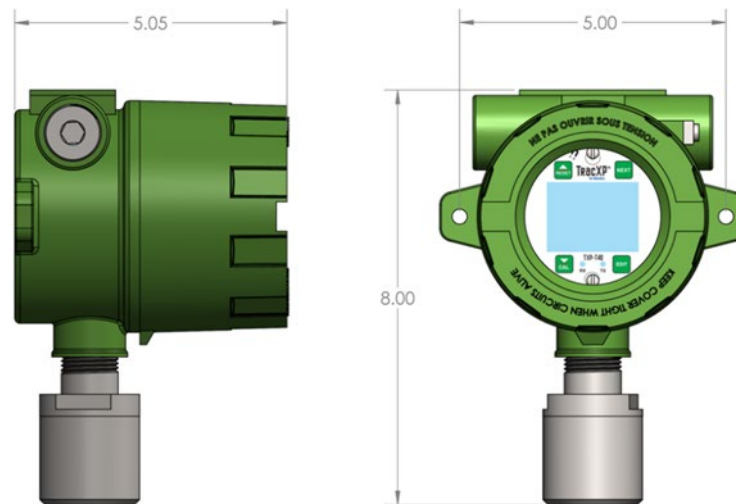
TXP-T20/T30 Explosion-Proof Housing
